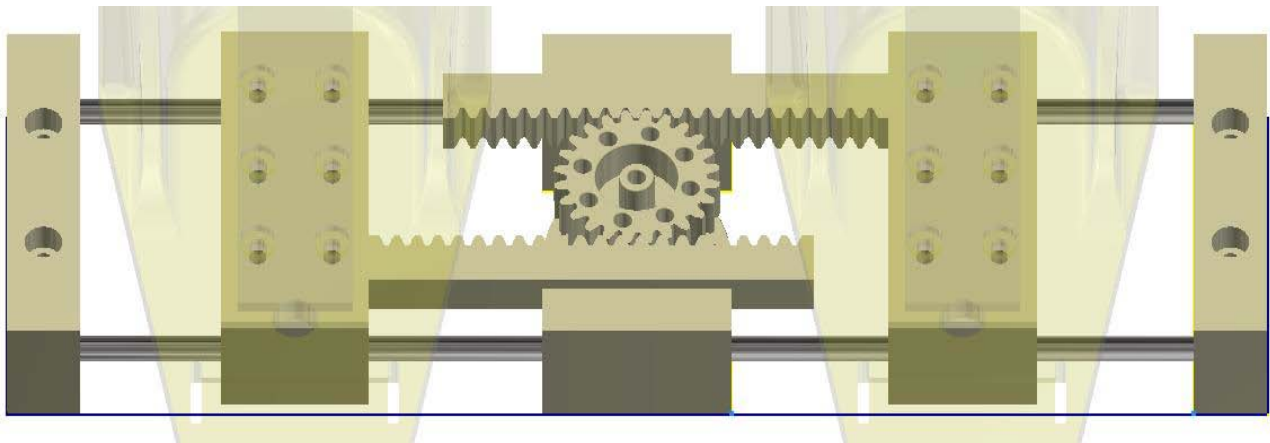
Foot width adjustment mechanism with pin brake and holes between pinion and axle.
